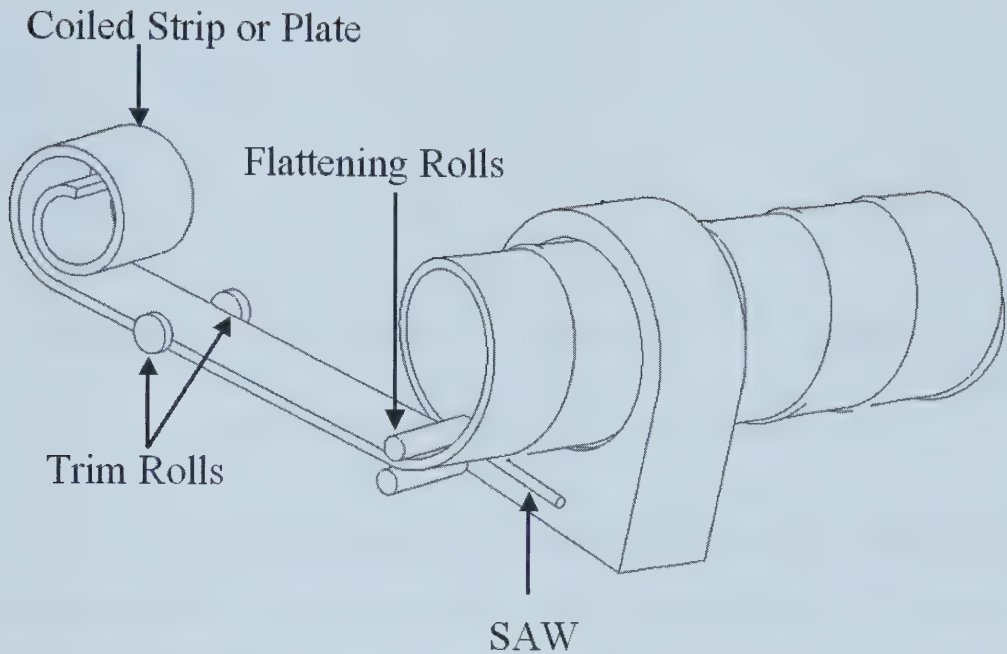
Submerged-arc weld spiral pipe forming.
